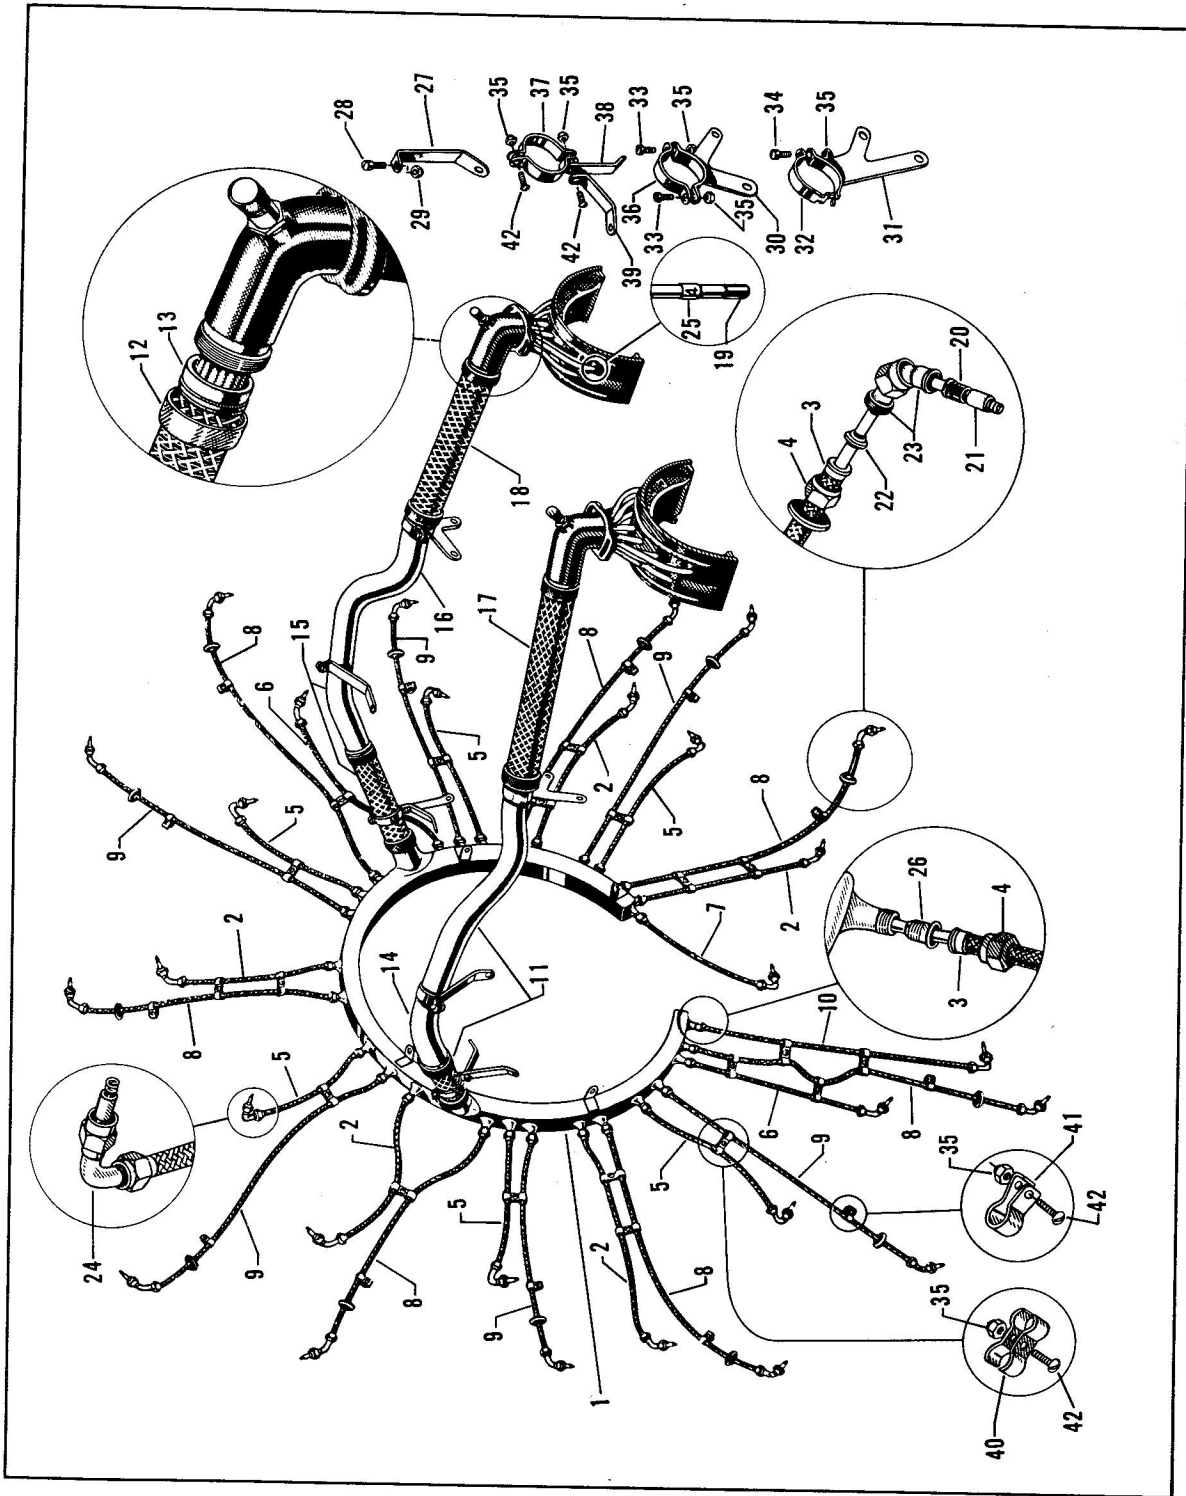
Ignition System - R 1830 (90C and 90D)
